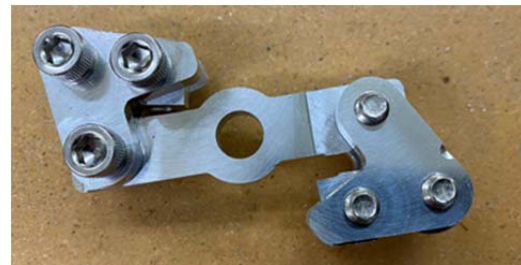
Assembled center section including ball bearings which apply pressure to the inside of the flexspline
